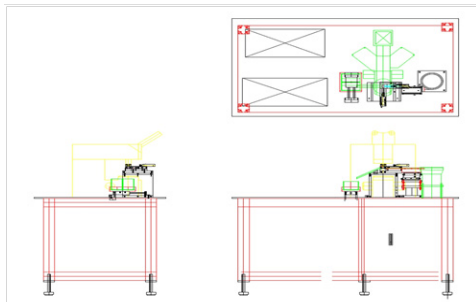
Molybdenum pin vision inspection device assembly drawing
